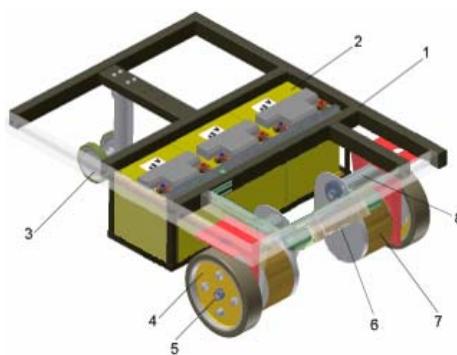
Lay-out of the particular subassemblies: 1 - . robot supporting structure, 2 batteries, 3 - supporting self-adjusting wheel, 4 - drive wheels, 5 - encoder, 6 – cogged pulley, 7 - reducer, 8 - driving motors
